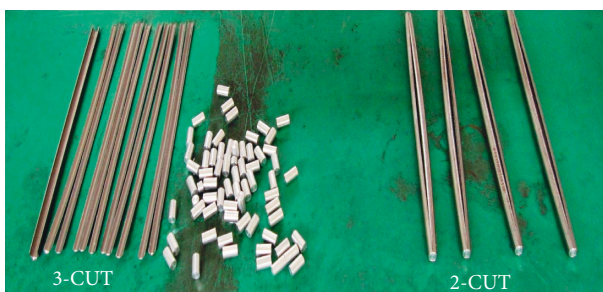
Slitting shapes of 2-CUT and 3-CUT modules.
